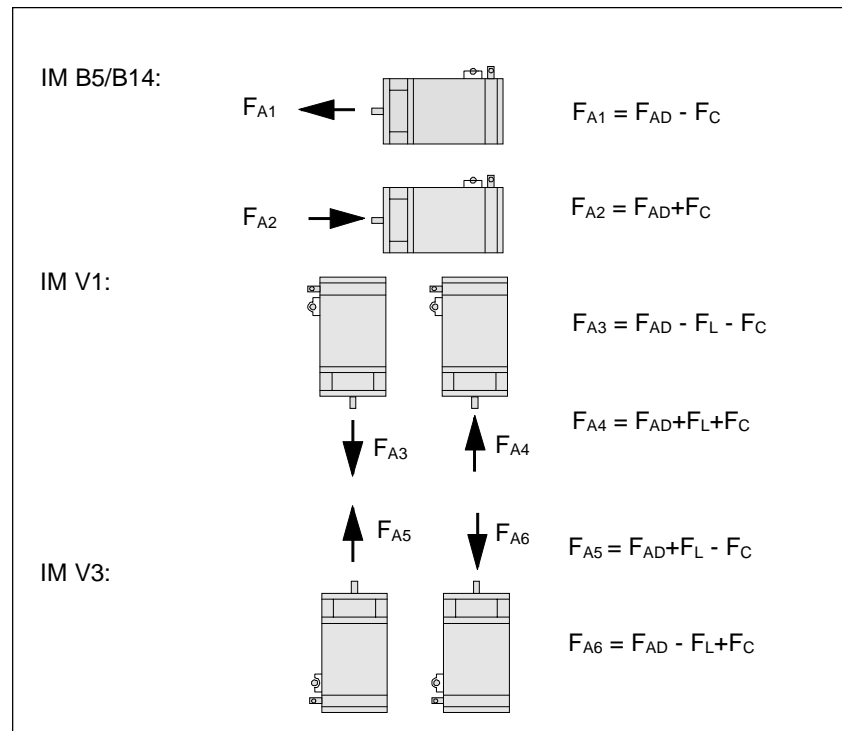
Permissible axial force corresponding to the mounting position for 1FT6 motors
